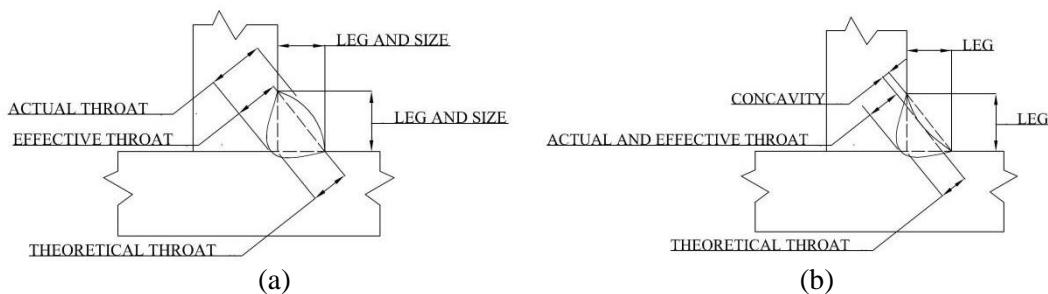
TT according to AWS A3.0; (a) convex fillet welds, (b) concave fillet welds [8]
